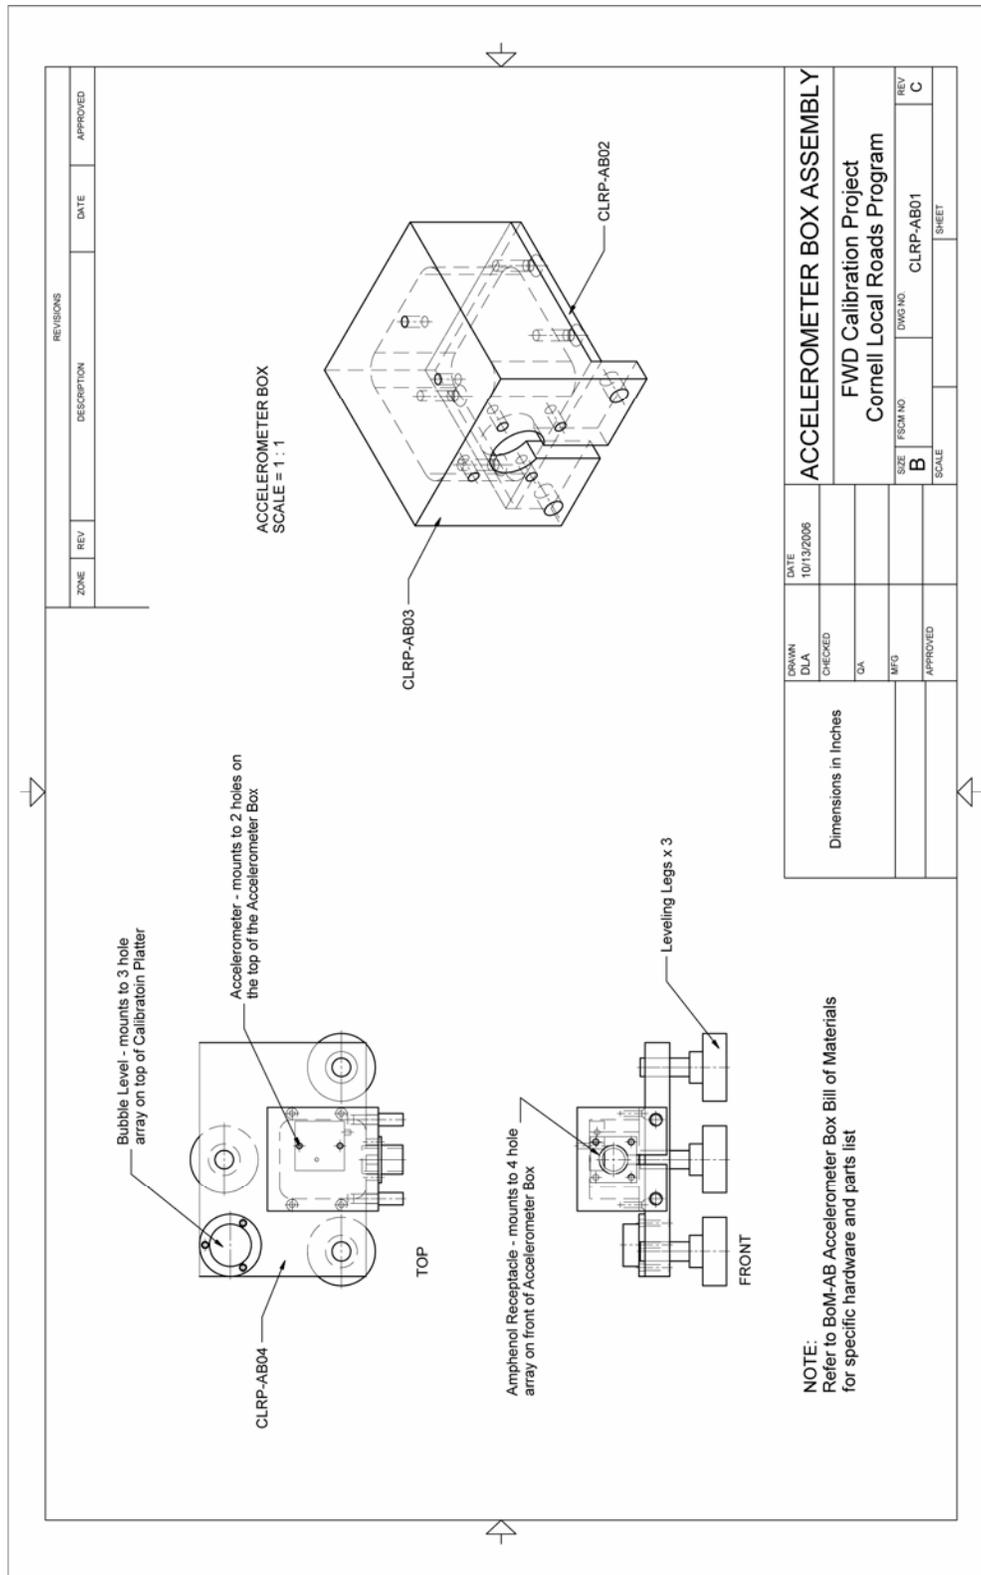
Drawing. CLRP-AB01 Accelerometer Box Assembly.
